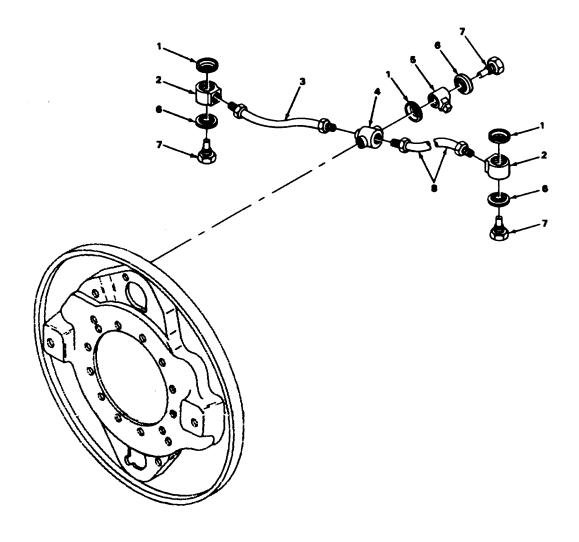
HYDRAULIC BRAKE LINES AND FITTINGS.
